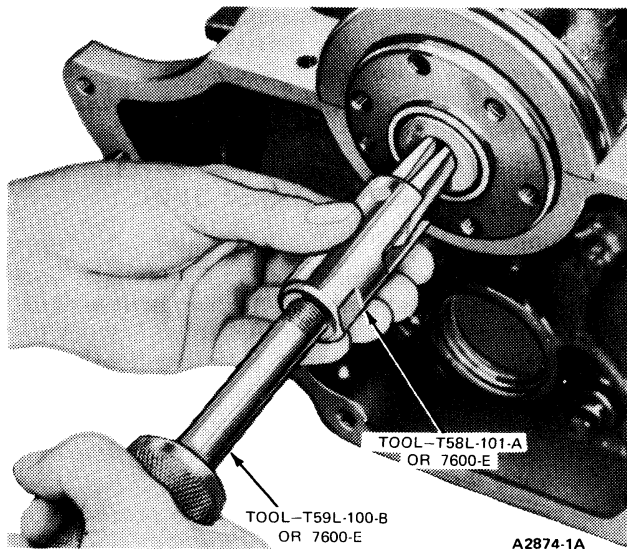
Removing Clutch Pilot Needle Bearing Assembly
